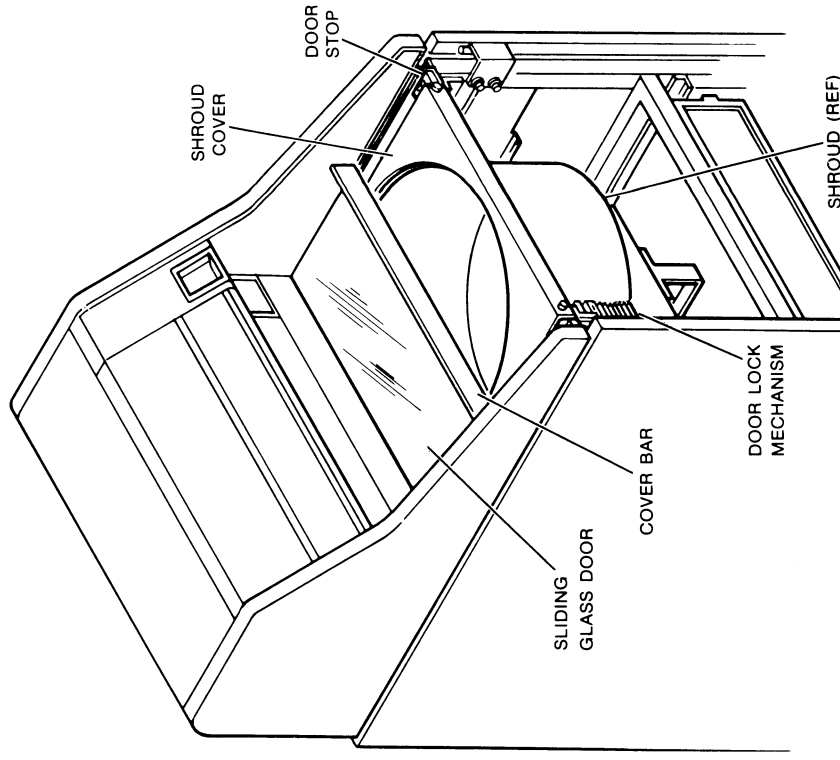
PACK ACCESS DOOR ASSEMBLY
